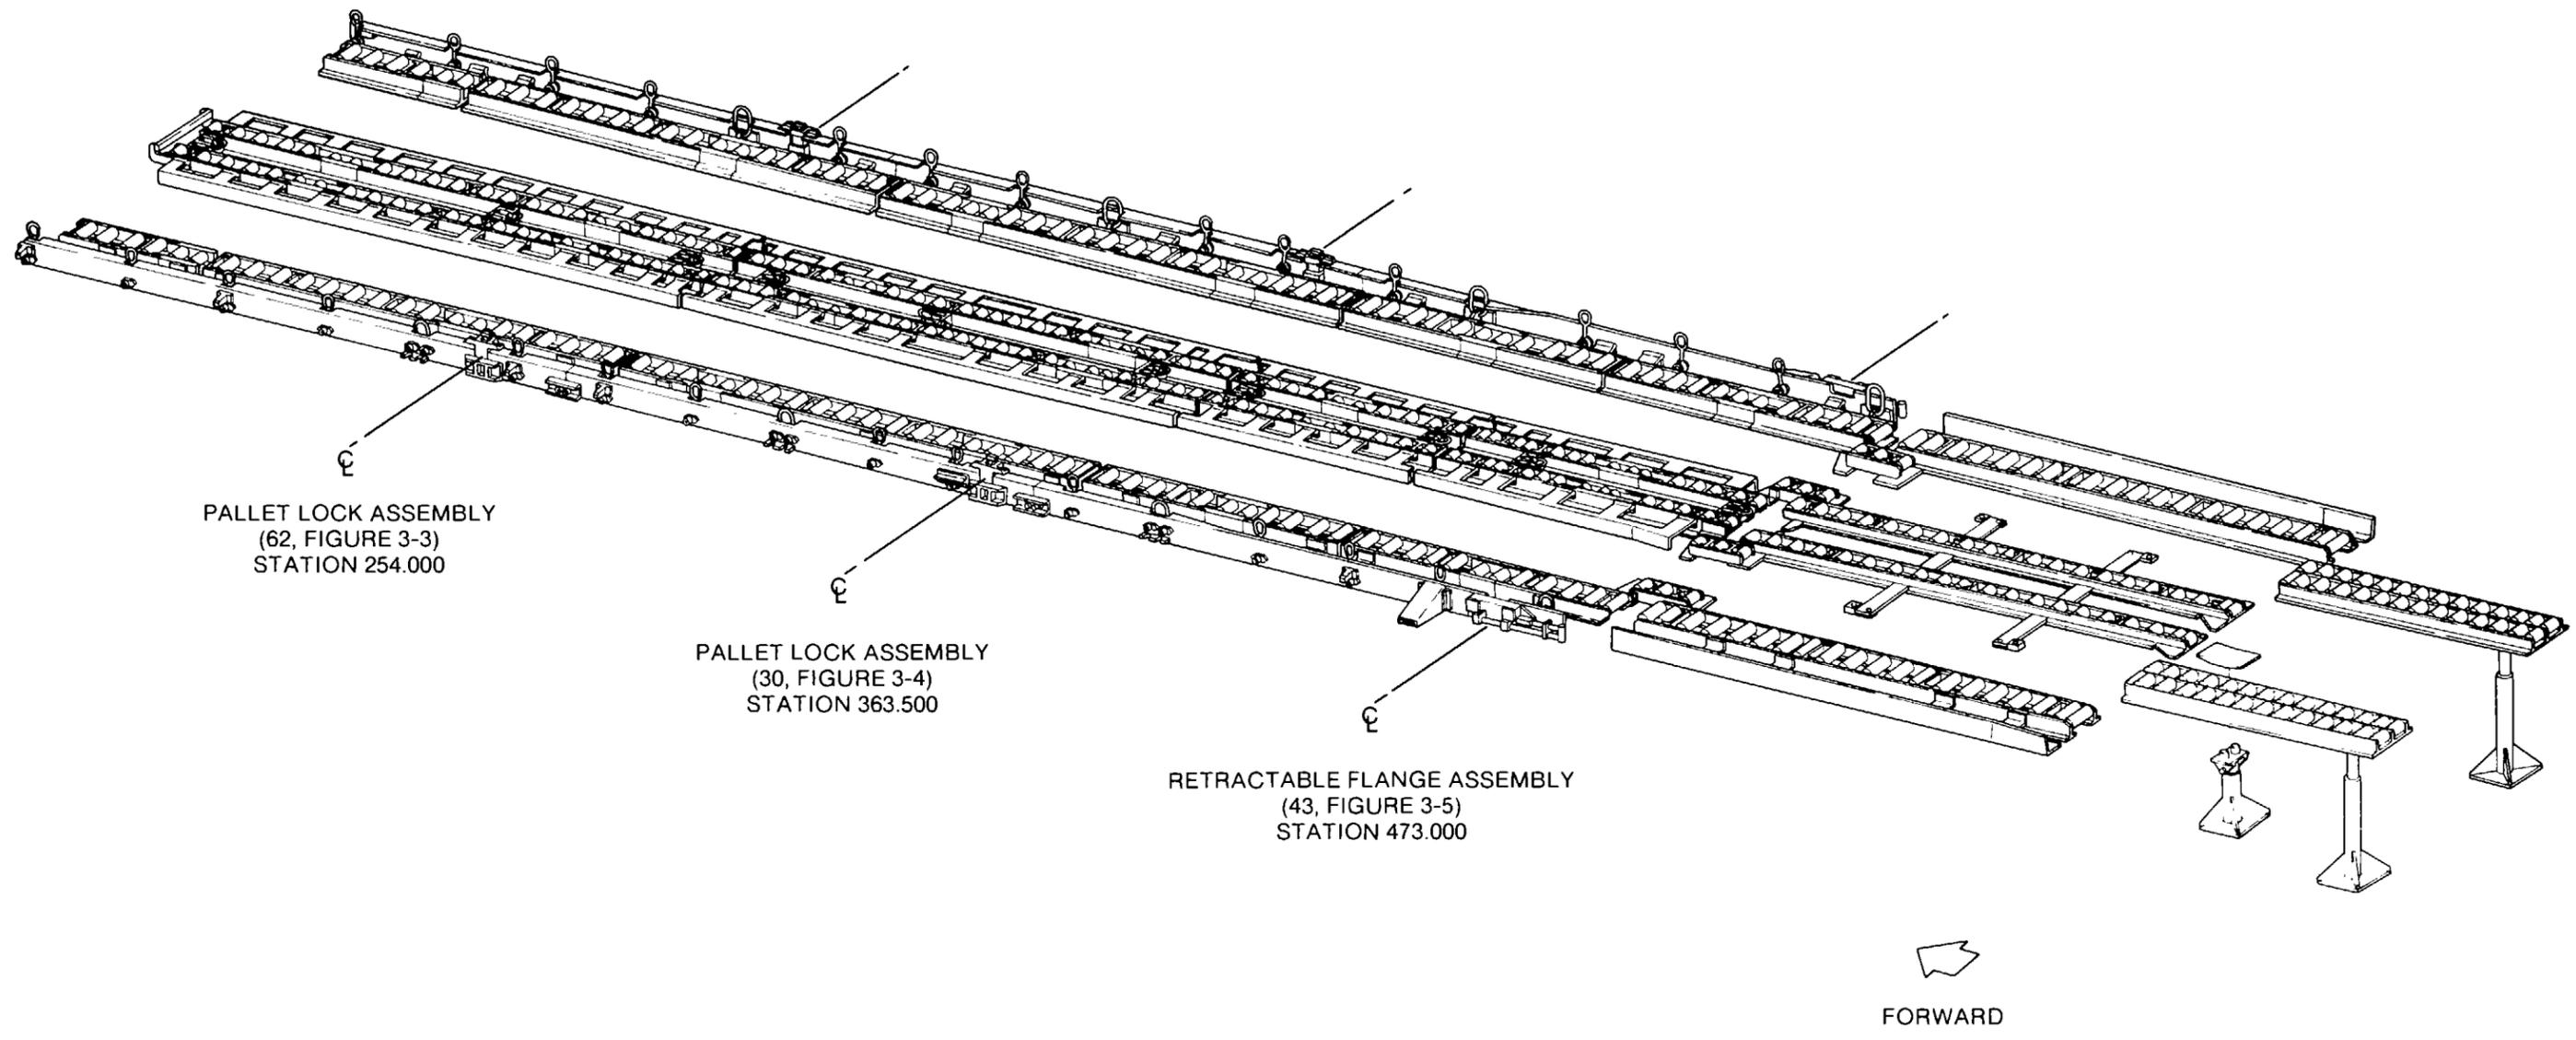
Location of Pallet Lock and Retractable Flange Assemblies
